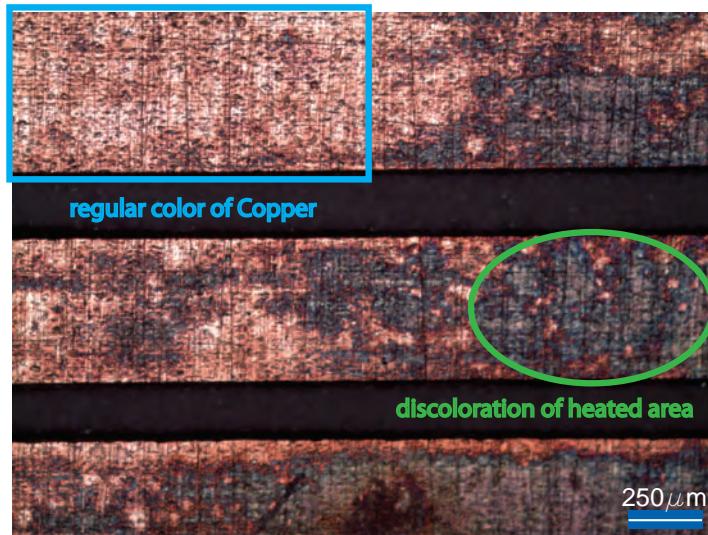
Photograph showing the degrading of the copper layer after excessive heat exposure during the soldering process.
